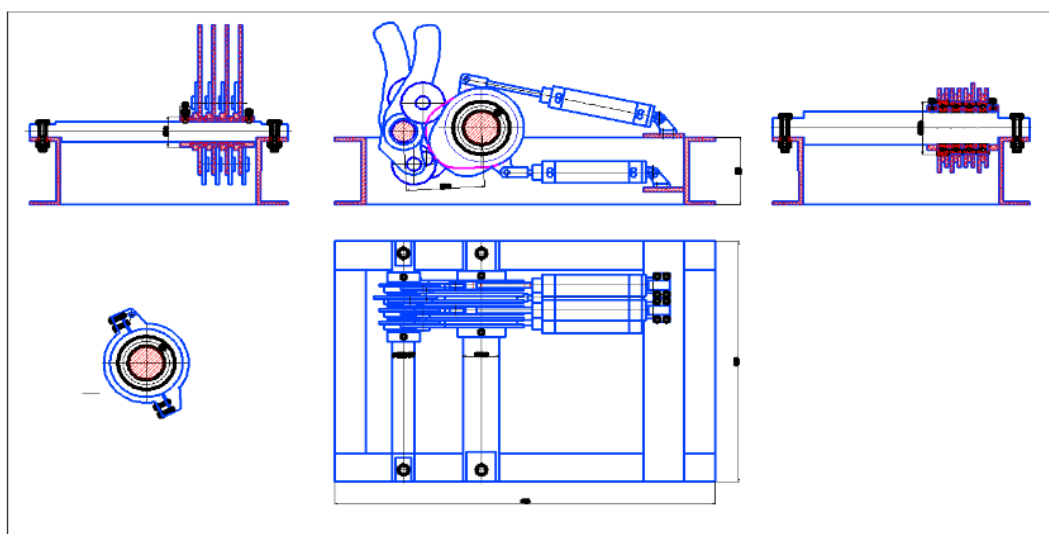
General View Technical Drawing of the Pneu-mechanical Dobby
